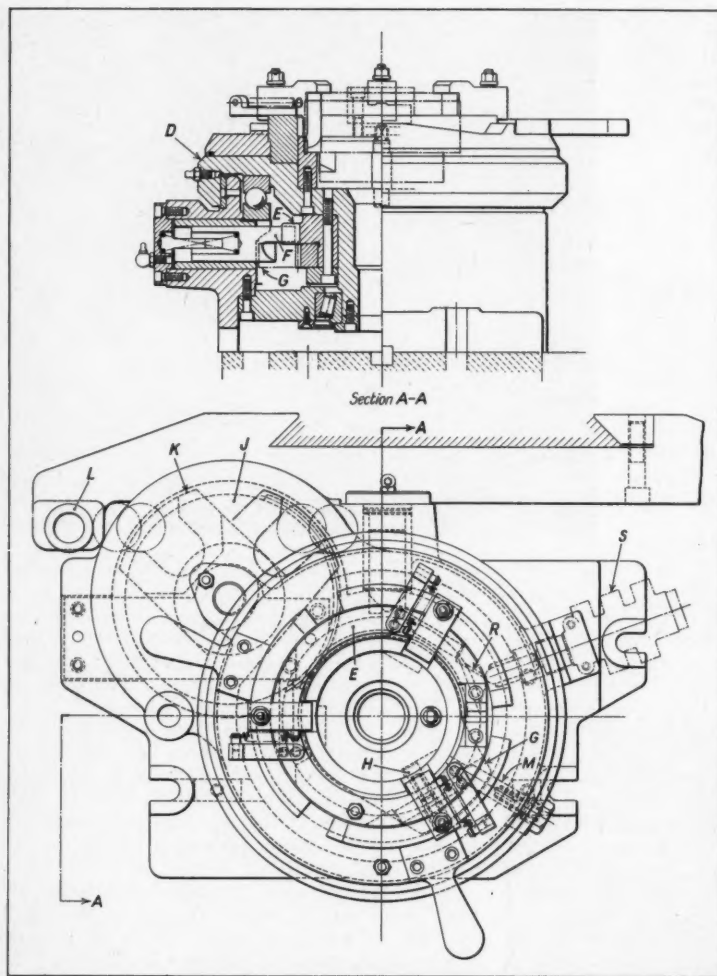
Plan and part-sectional elevation of the left-hand fixture on the Cincinnati machine in Fig. 21, showing the mechanisms for locating and indexing the table between successive milling operations
